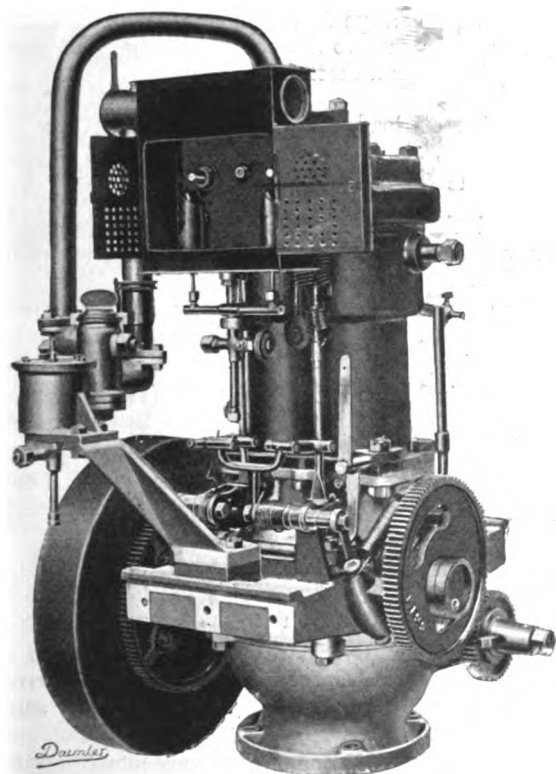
VIEW OF DAIMLER 6 B.H.P. GRAVITY-FEED MOTOR.
